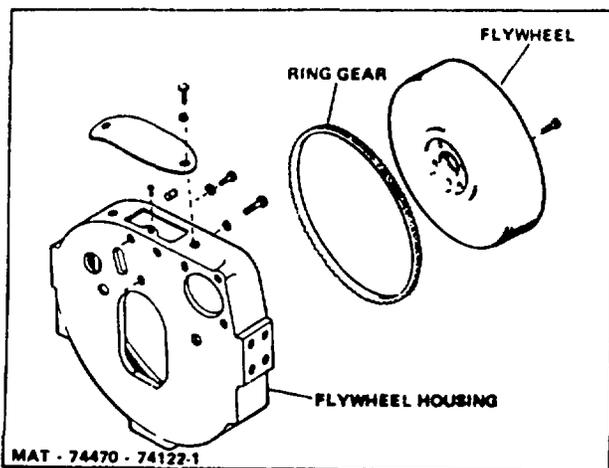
Flywheel, Ring Gear, and Flywheel Housing
